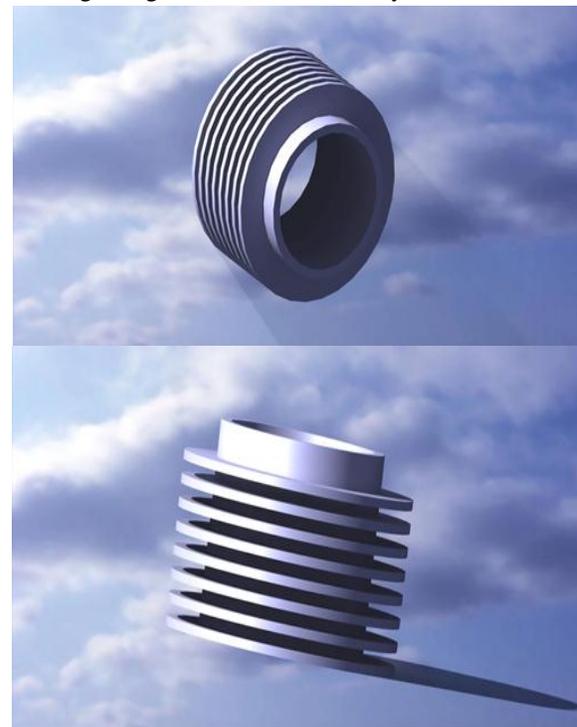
geometrical modal of cylinder barrel in CATIA V5
